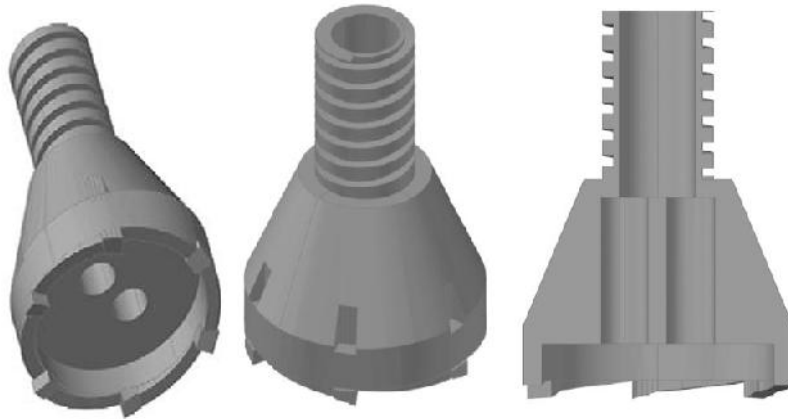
Three dimensional views of the newly designed coring & non-coring bit
